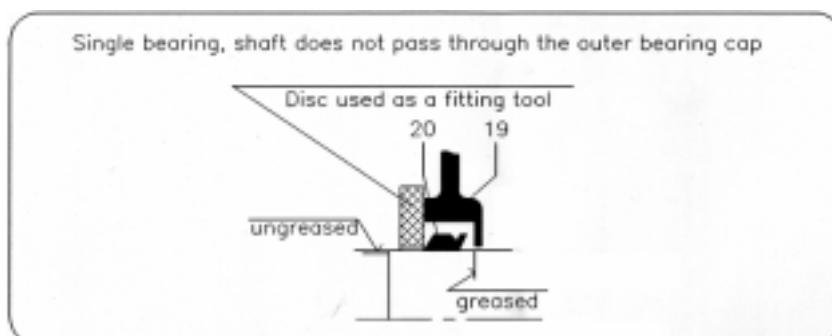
Fitting instructions for V-ring and oil seal for shaft
